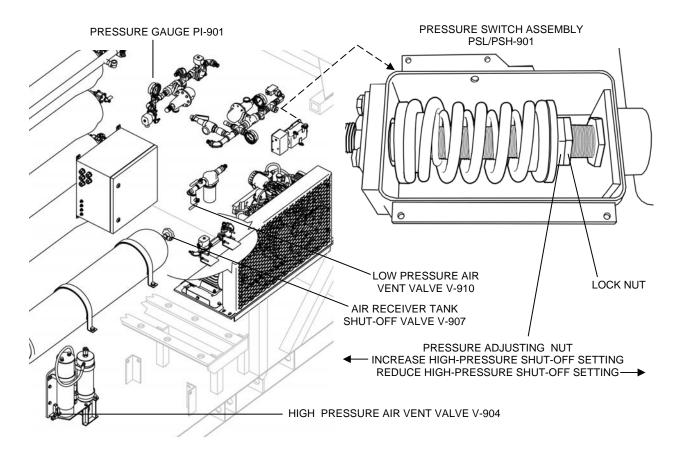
Pressure Switch PSL/PSH-901 Adjustment.
